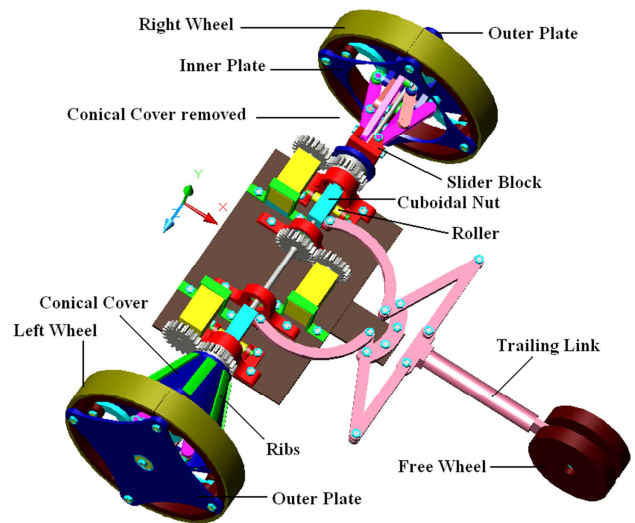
Isometric view of ELAN Robot with right Conical Cover and Cover plate removed when wheel is closed
